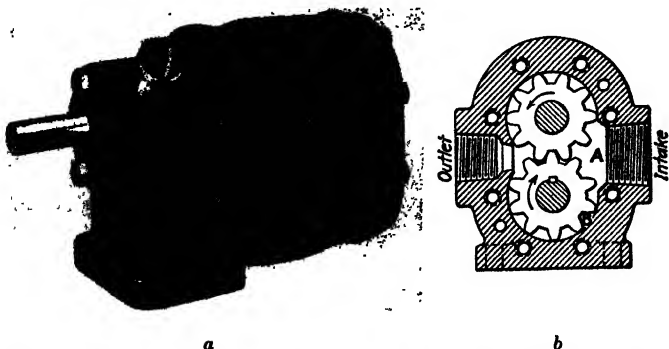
Gear pump. (*The Brown & Sharpe Manufacturing Company*)
